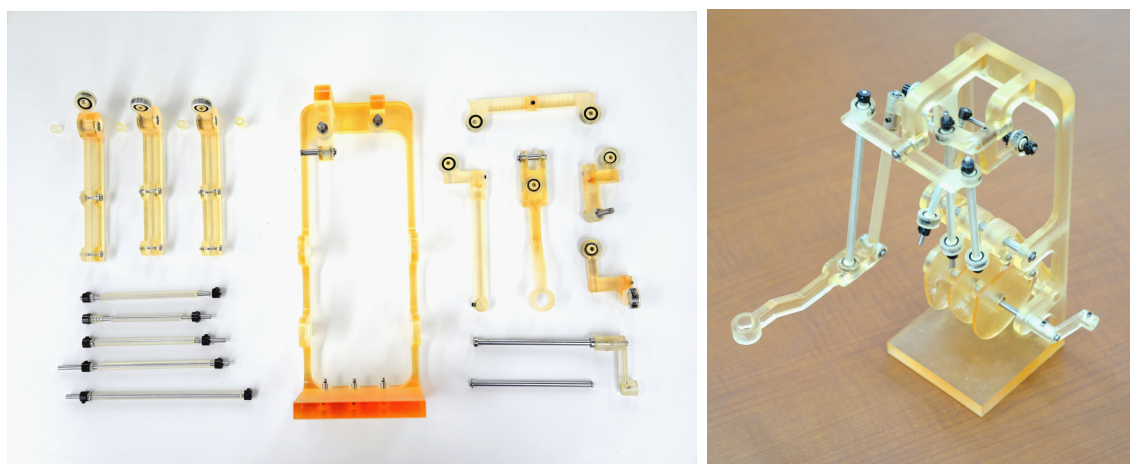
Fabricated PDA-0 using 3D printed and metal parts. Metal parts were used as bearings and spherical bearings.
